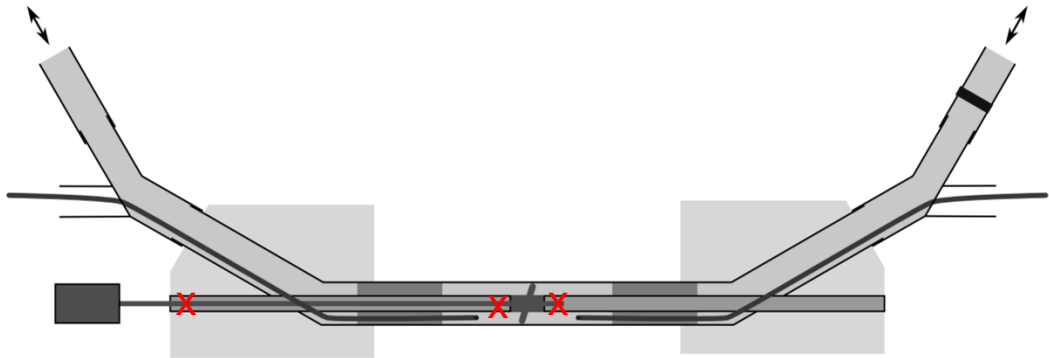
Location of the three bearings, marked by “x”, supporting the driving axis.
